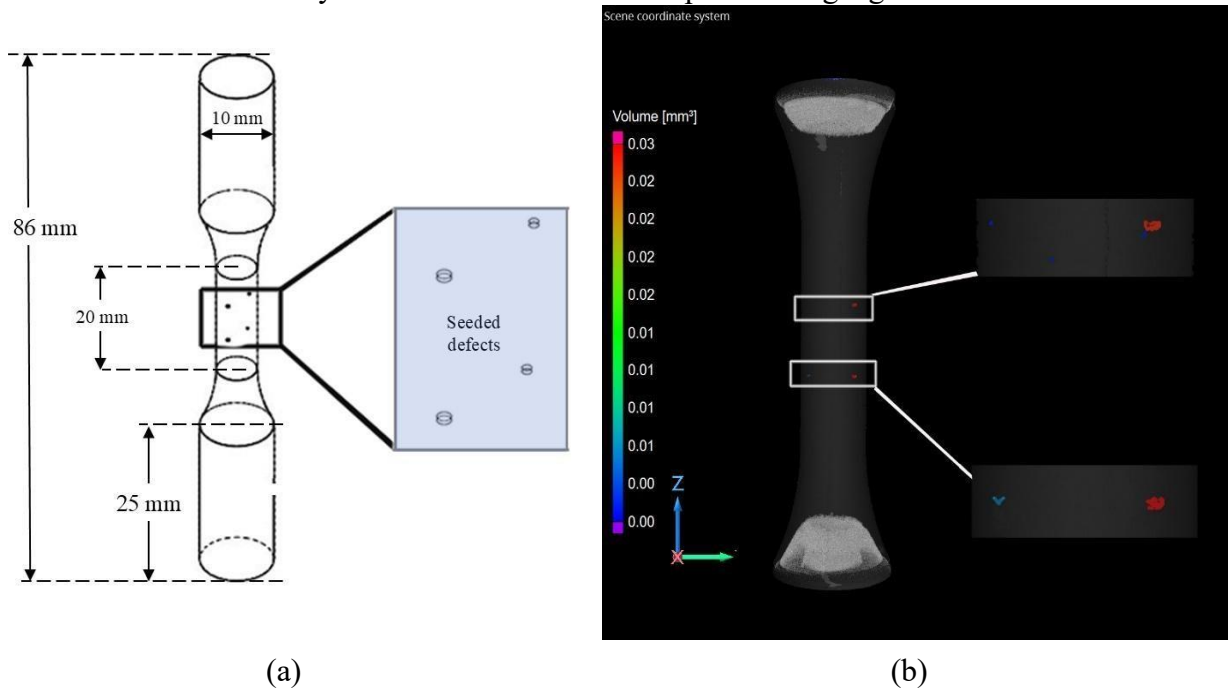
(a) Schematic of the designed Inconel 718 specimen containing intentionally seeded defects within the CAD model, and (b) XCT image confirming their successful formation.
